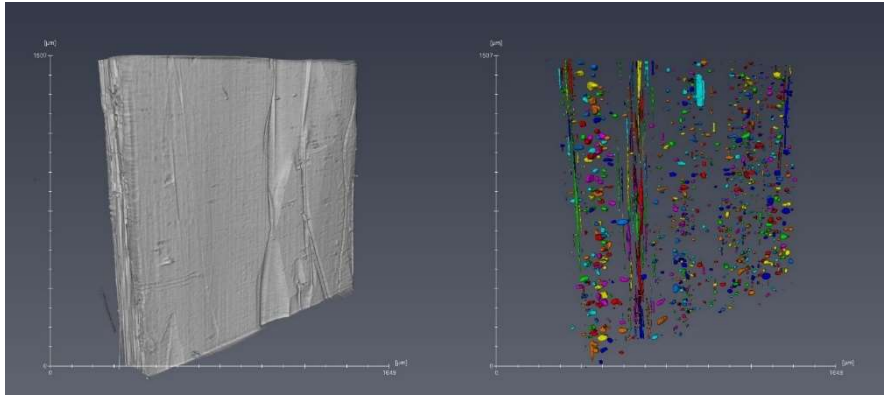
SIRT, at left hand side, reconstructed volume and at right hand side, segmented, counted and labelled voids.
